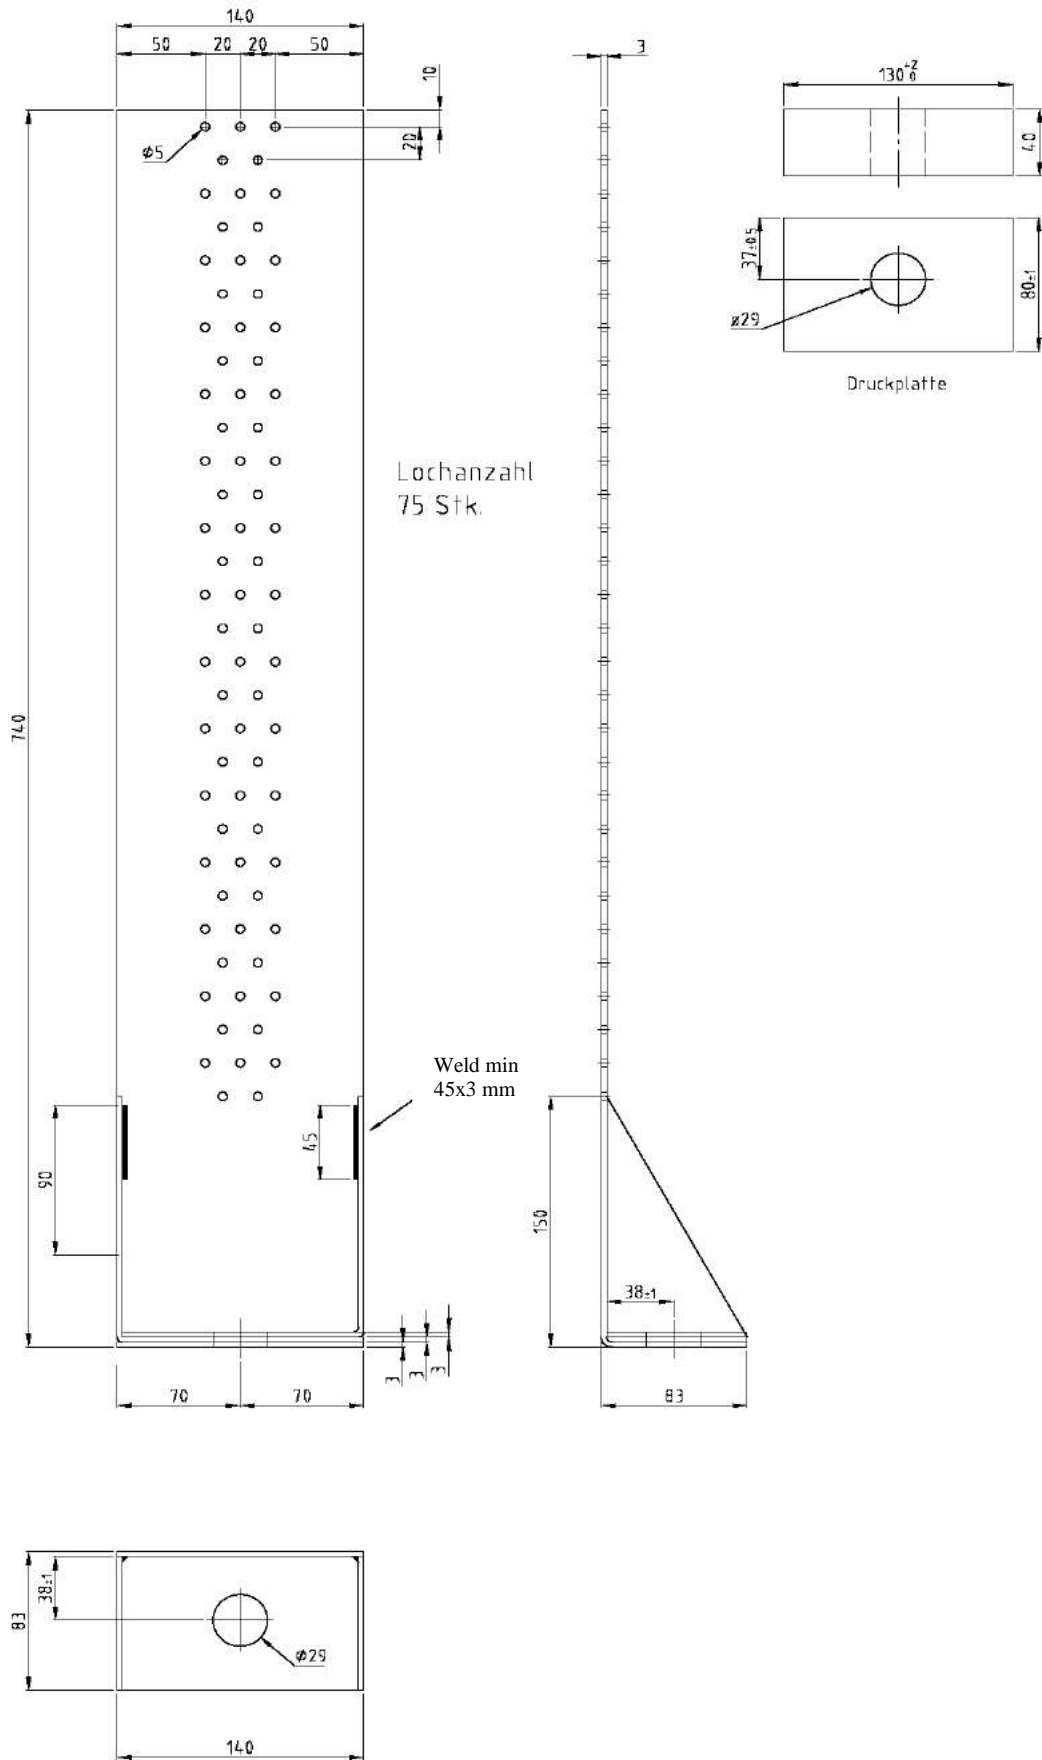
Dimensions of type WHT740 (drawing with washer 80x130x40)
